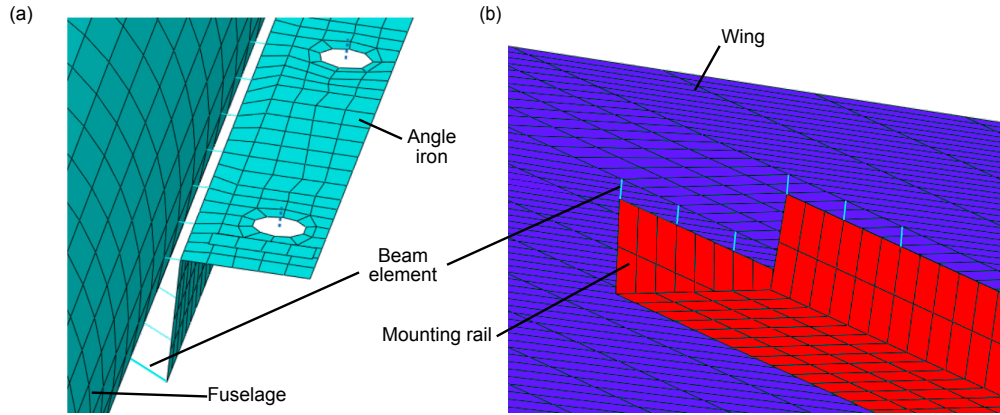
Zoomed-in views of the beam elements representing welds between (a) the fuselage and the angle irons used to mount the wings and stabilizers, and (b) the mounting rails and the wings.
